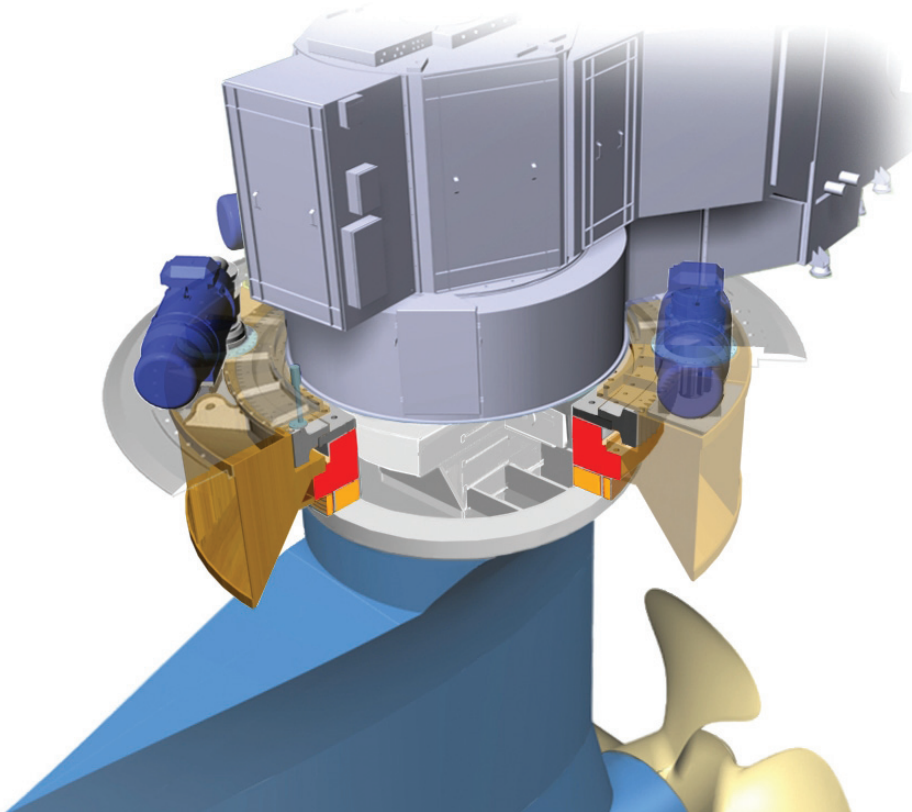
Split view of the top delivery showing the steering gear mechanics
